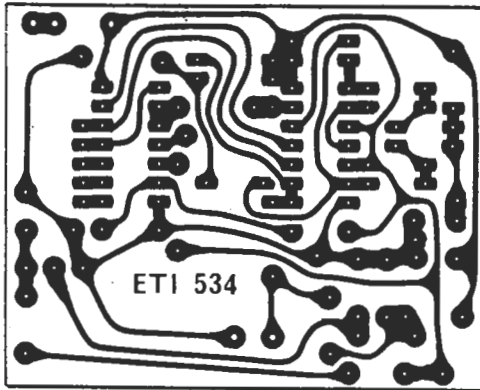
Printed circuit board layout. Full size 64 x 52mm.
